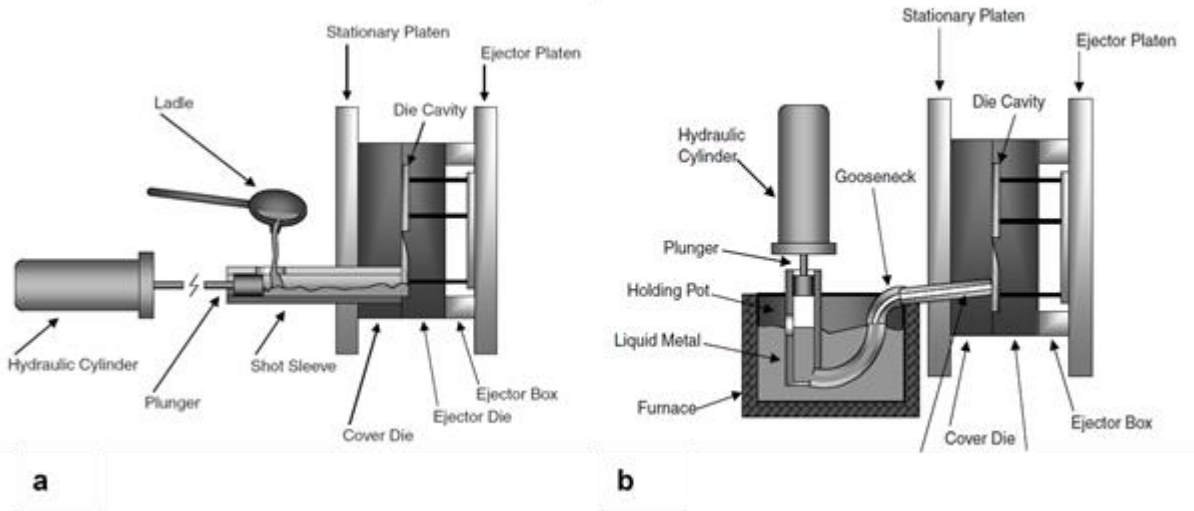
Graphical illustrations of the (a) cold chamber, and (b) hot chamber metal injection systems [9].
